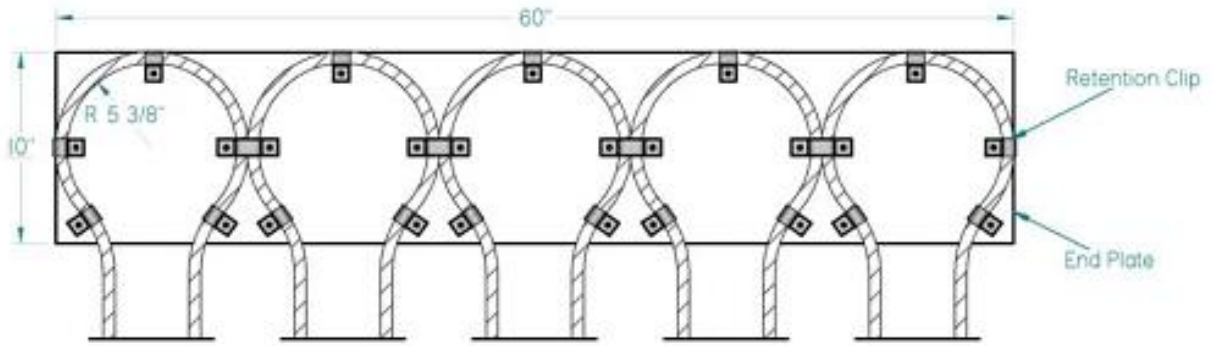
End plate of 16 gauge steel sheet with clips to hold down return bends
